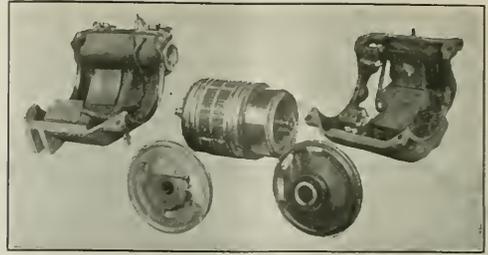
SELF-VENTILATED MOTOR DISASSEMBLED
